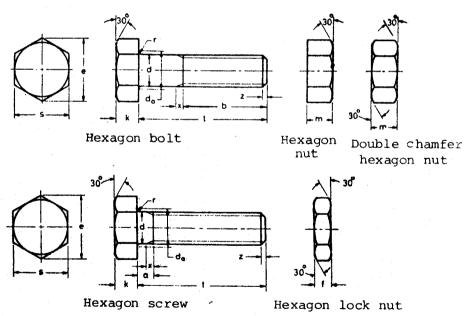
Dimensions of bolts, screws, nuts and lock nuts
